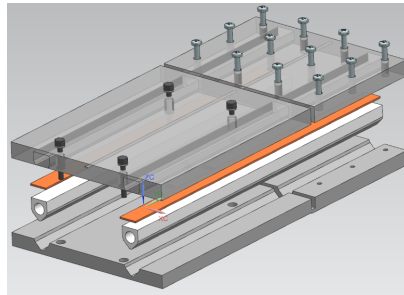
Exploded CAD model of cold plate including BN pipes, gauge 20 copper plate (0.8 mm thick), encapsulated by conventional manufacturing of three-piece SLM aluminum alloy block (final envelope size is 100 mm x 185 mm x 18 mm)
